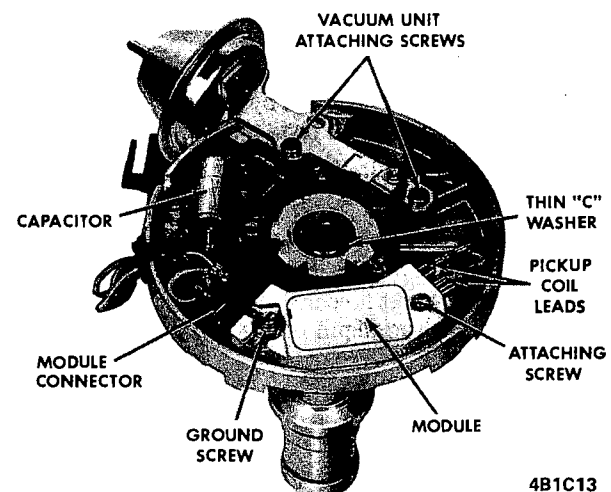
C-6 - H.E.I. Distributor Housing V-8 Shown
